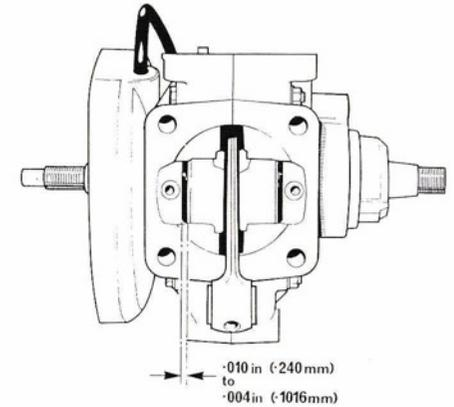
Showing crankshaft end float checking point at crankcase mouth.
